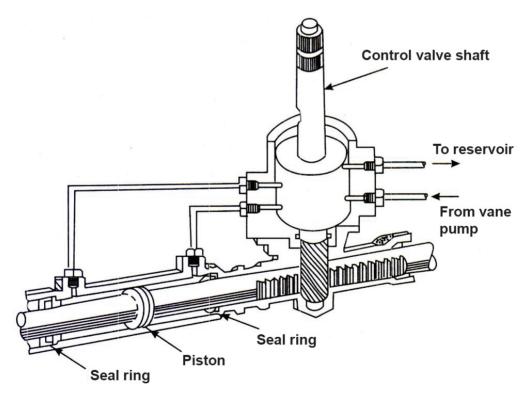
Rack and Pinion Hydraulic Power Steering.
